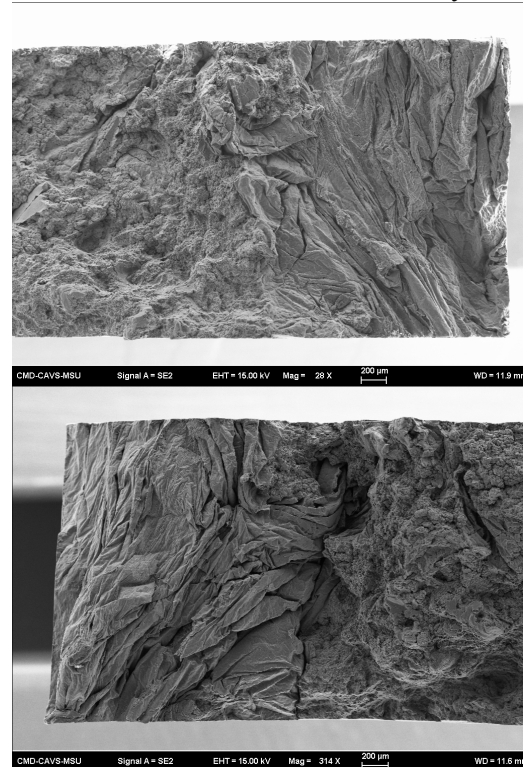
Scanning electron microscope images of oxide films on the two sides of the fracture surfaces of a tensile test specimen taken from AZ91, sample C1.
